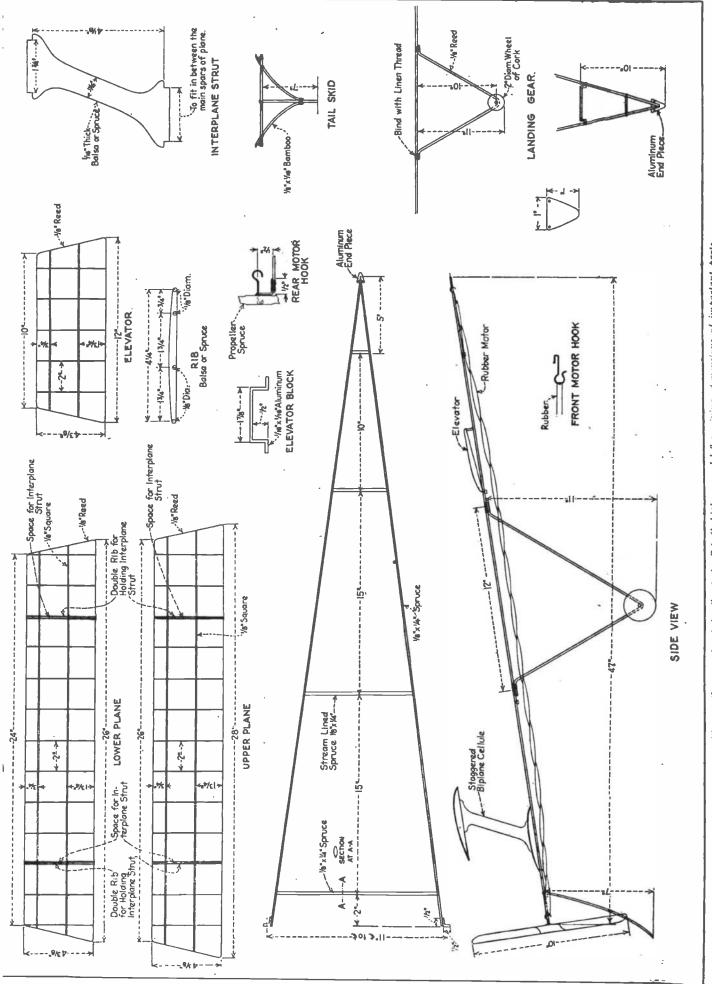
Constructional desails of the R.O.G. hiplane model fleer giving demensions of important parts
